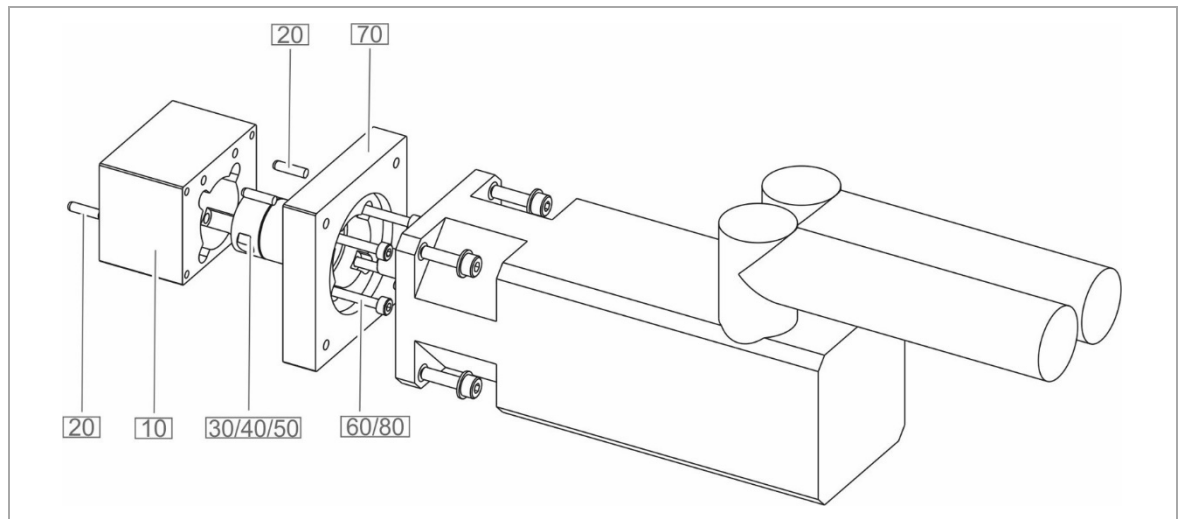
Flange for axial motor attachment, bolt circles 63, 66 and 67, exploded view
